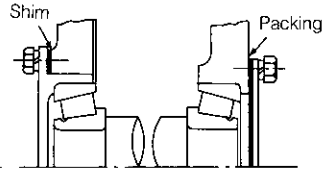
Examples of Clearance Adjusted by Shim Thickness of Outer Ring Cover
